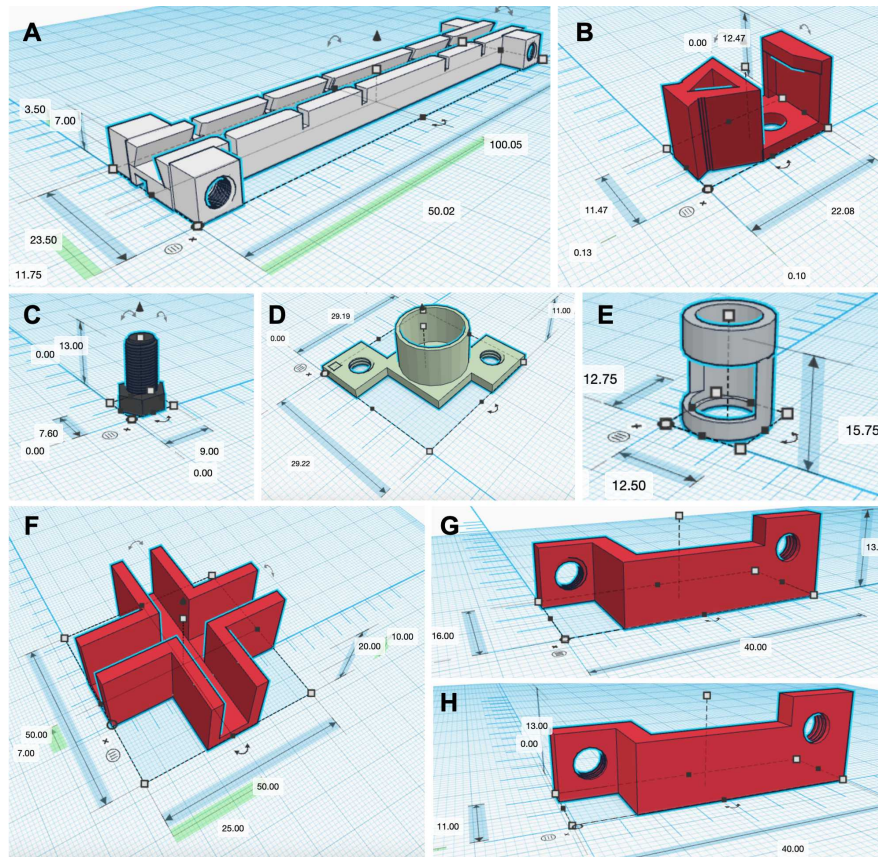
3D printed designs. Measurements are in mm. A) Linear guide rail. B) Linear guide rail block shaped to hold an IR sensor. C) Screw used as support to replace iron screws. D) Tube support. E) Magnet support. F) Cross bracket used as an acrylic frame aligner and stabilizer. G) Long support and H) short support to keep the linear guide rails in place. Only linear guide rail supports that rest on the outside face of the acrylic wall are shown. Linear guide rail support mirrors are not shown.
